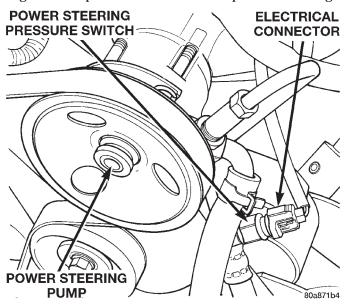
Power Steering Pump Pressure Switch—2.5L Engine
